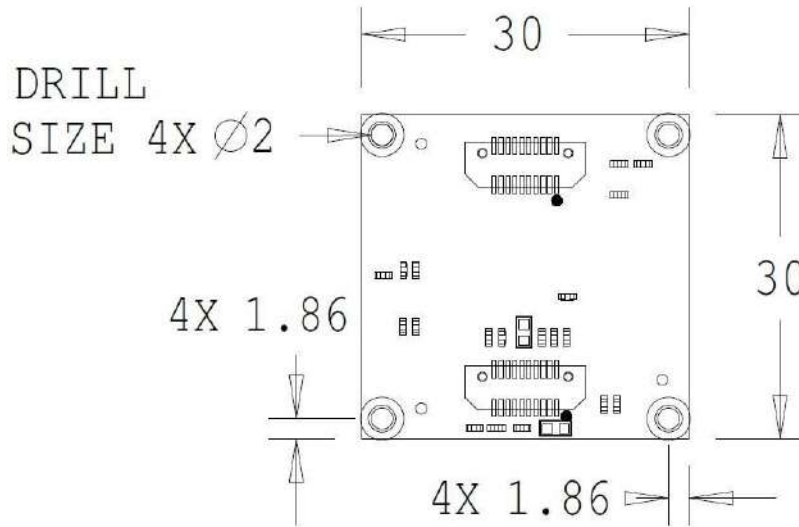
e-CAM200\_CUOAGX Mod Board Rear View Mechanical Dimensions
